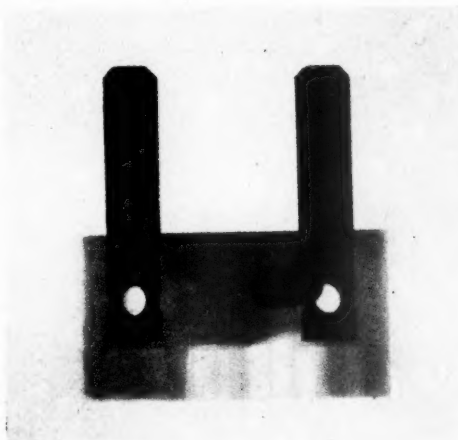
X-RAY PHOTOGRAPH OF MOULDING WITH METAL INSERTS.
